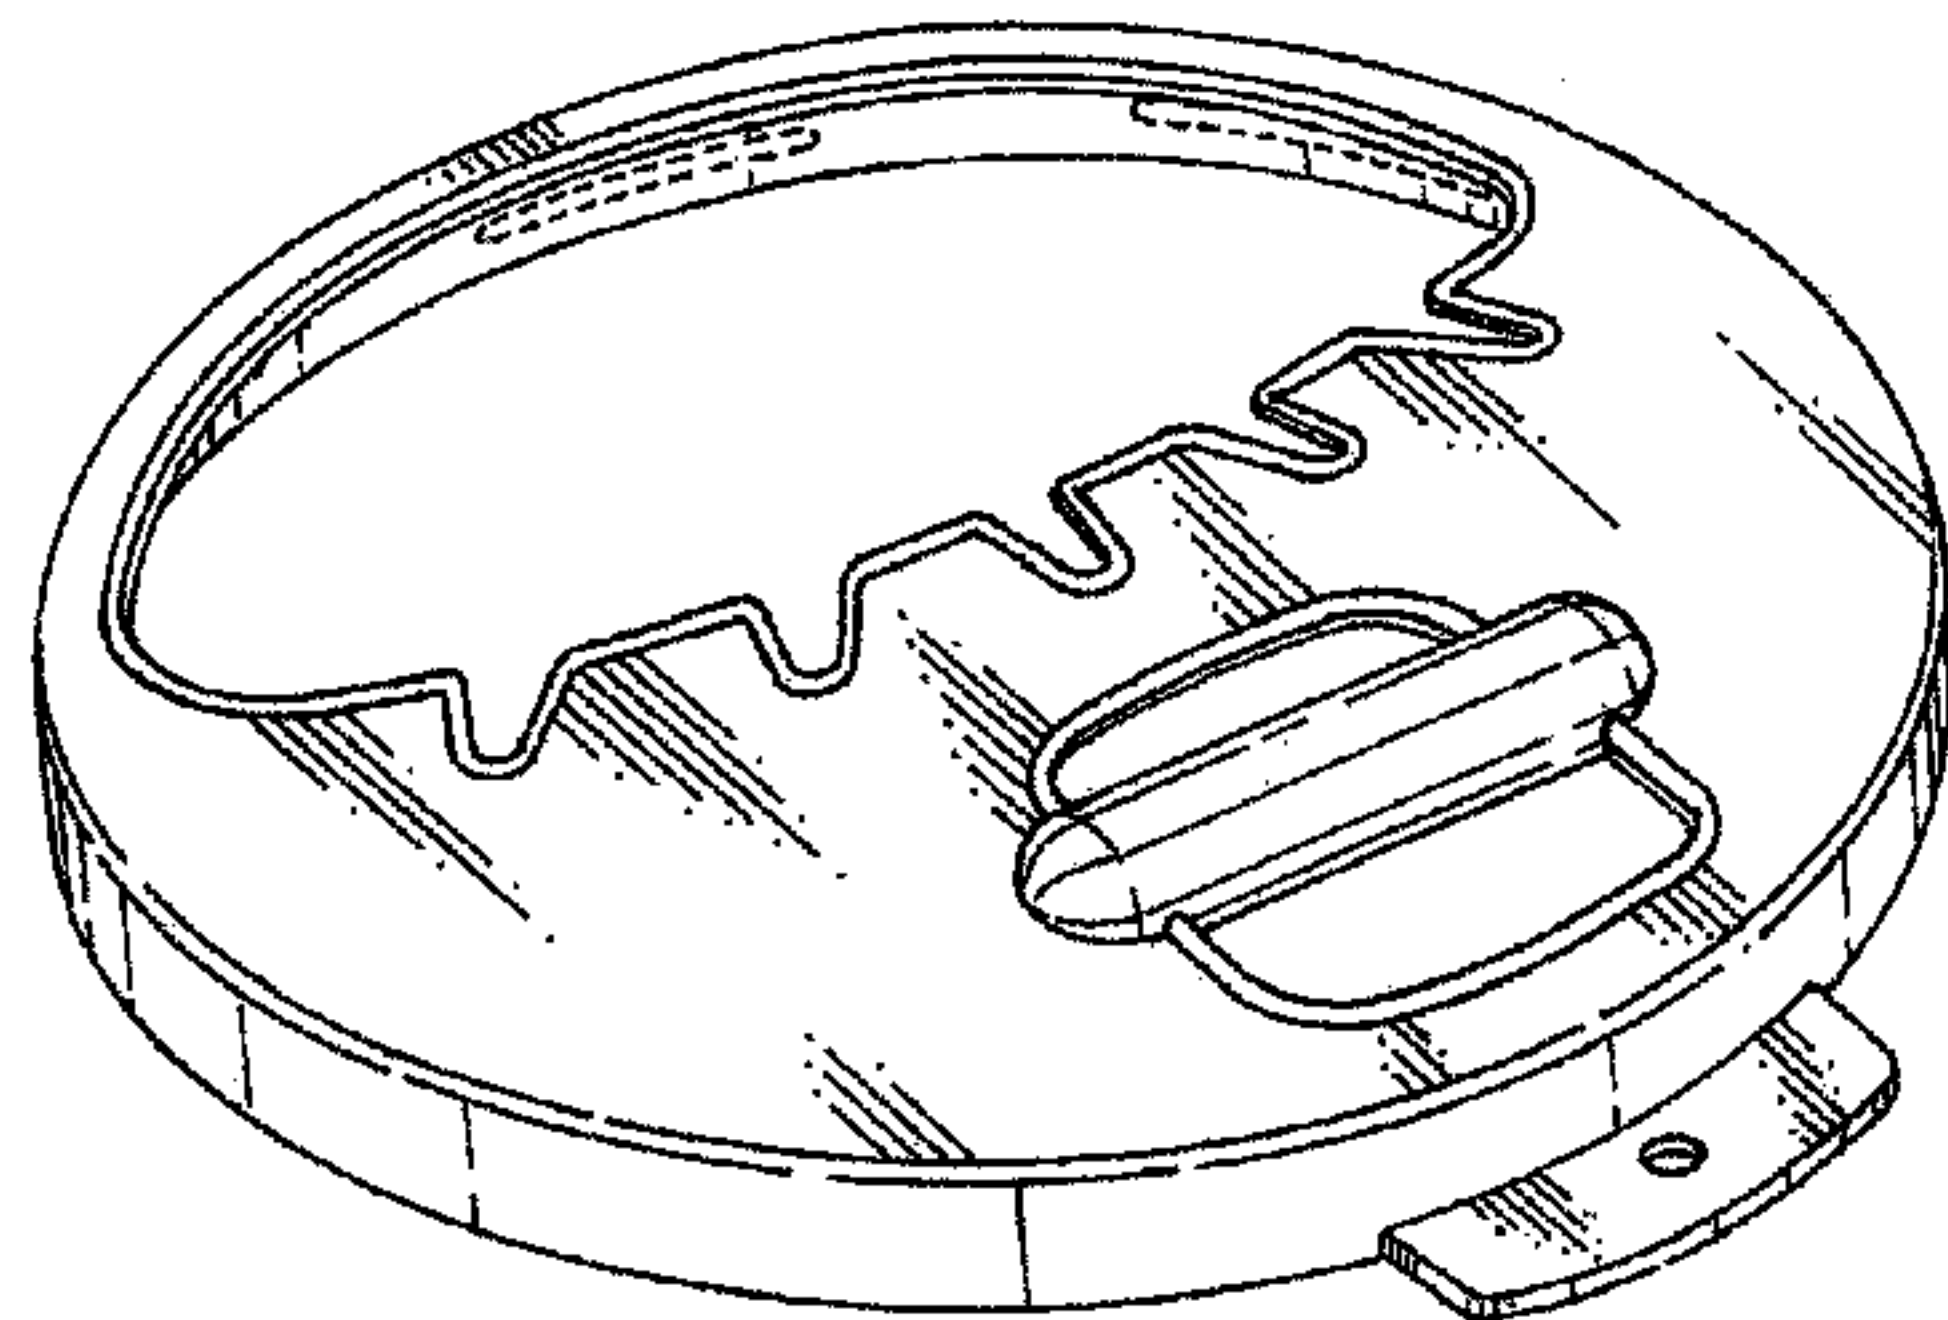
is a perspective view of the assembled trash collecting device of the invention with the bottom ring inserted within the top piece; and,
